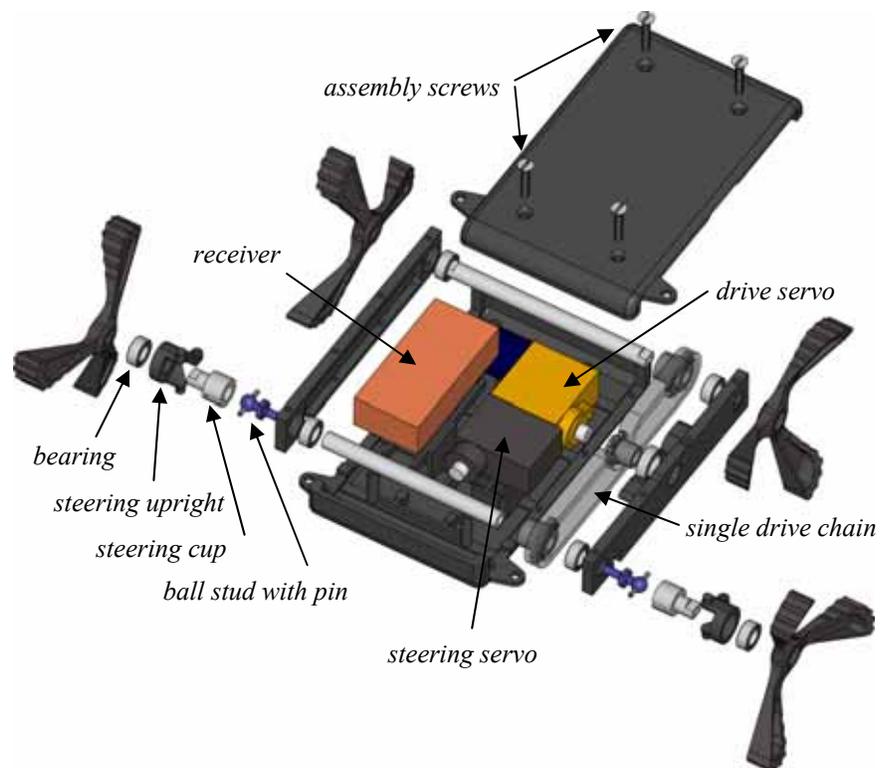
Exploded view of showing the assembly of Mini-Whigs 7 components.
